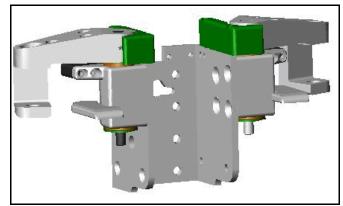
Shoulder Blocks assembled to UTS Assembly
